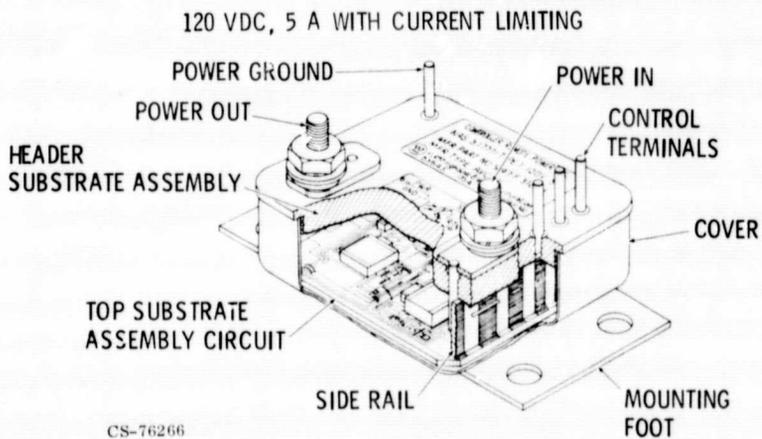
Cutaway view of a packaged, hybrid 120 V dc remote power controller.
